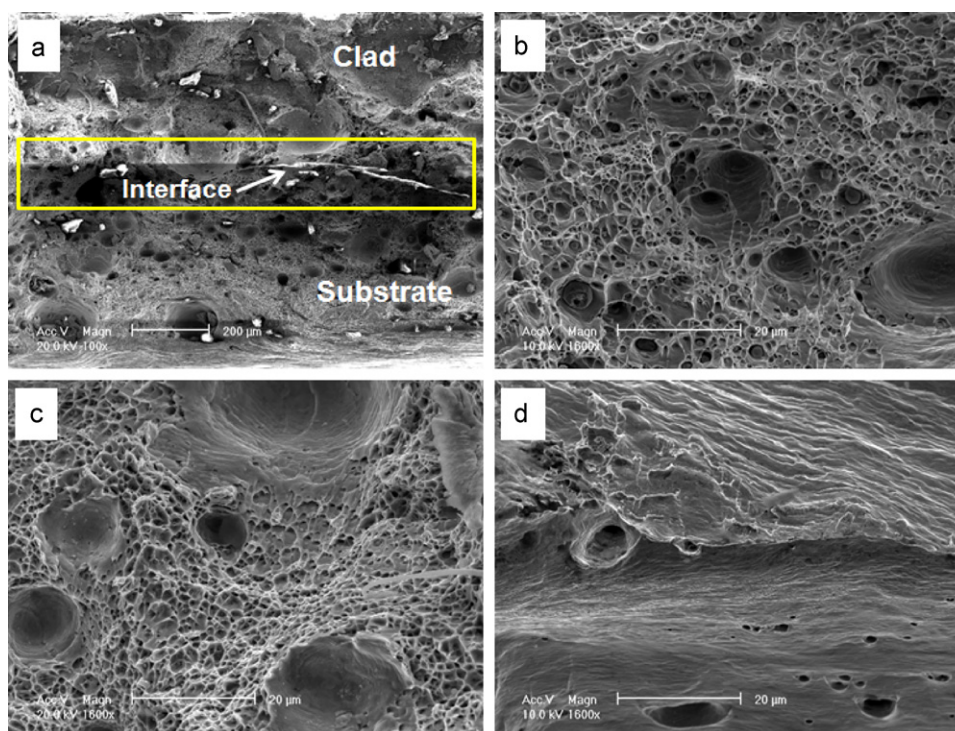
Fractographs of the tensile specimen showing (a) the overall surface, (b) magnified view of the clad, and (c) and (d) magnified view of the substrate.
